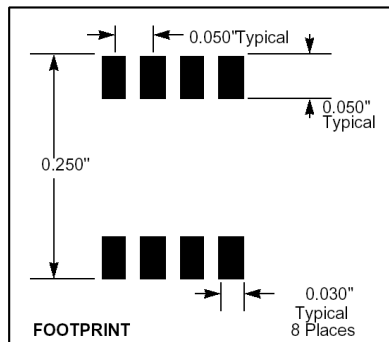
Footprint of IP Lock device (All dimensions in inch)
